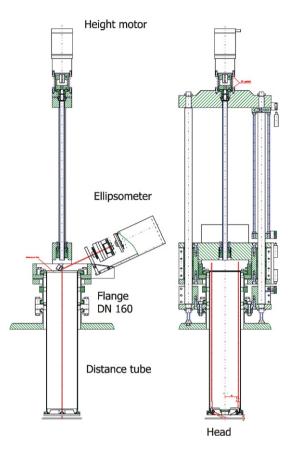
Ellipsometer setup through a single DN 160 flange.
